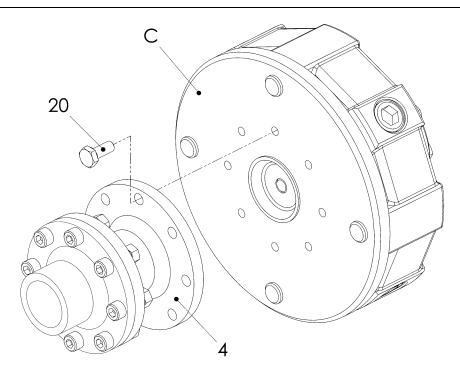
Screwing together the coupling and the adapter (4) using the screws (20)
